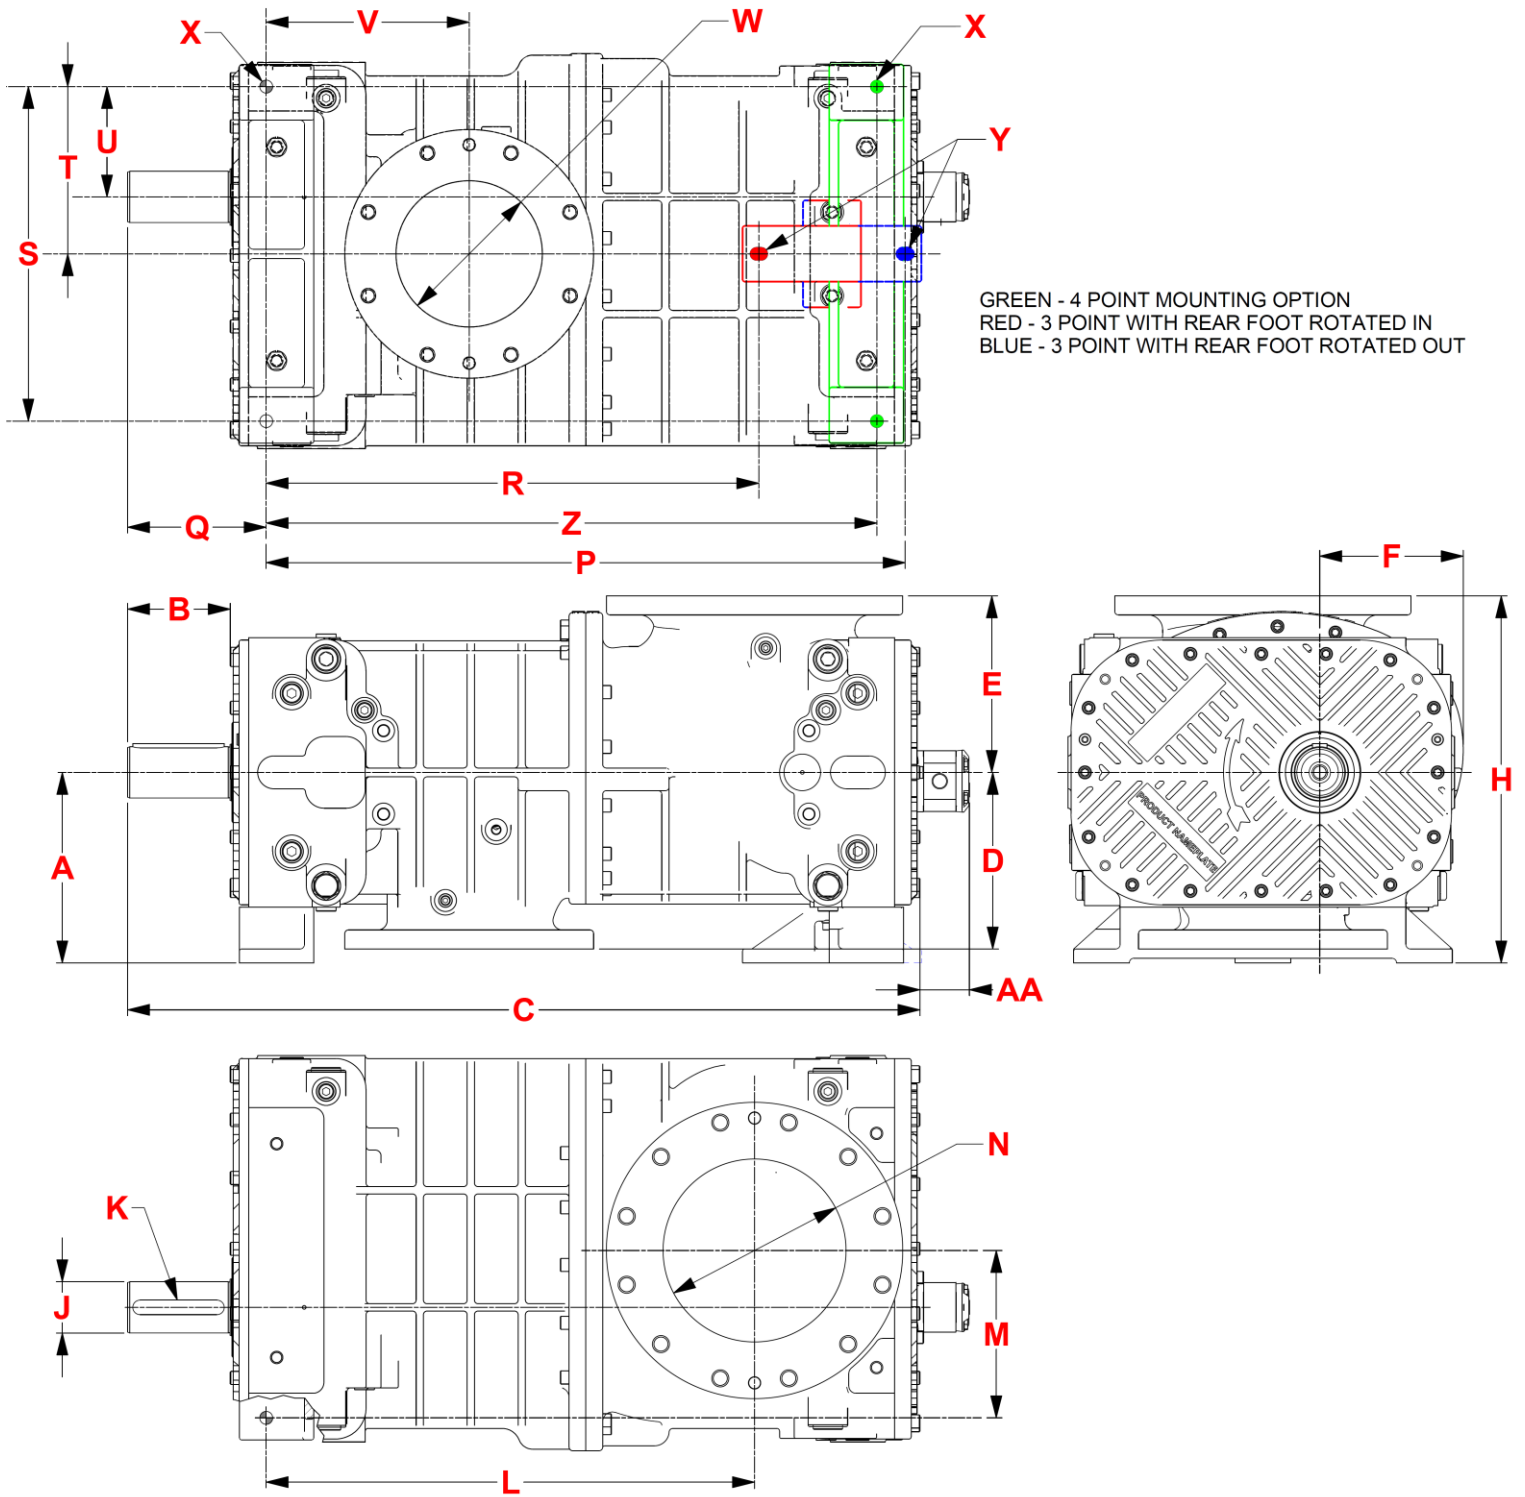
BOTTOM DISCHARGE OUTLINE DIMENSIONS
